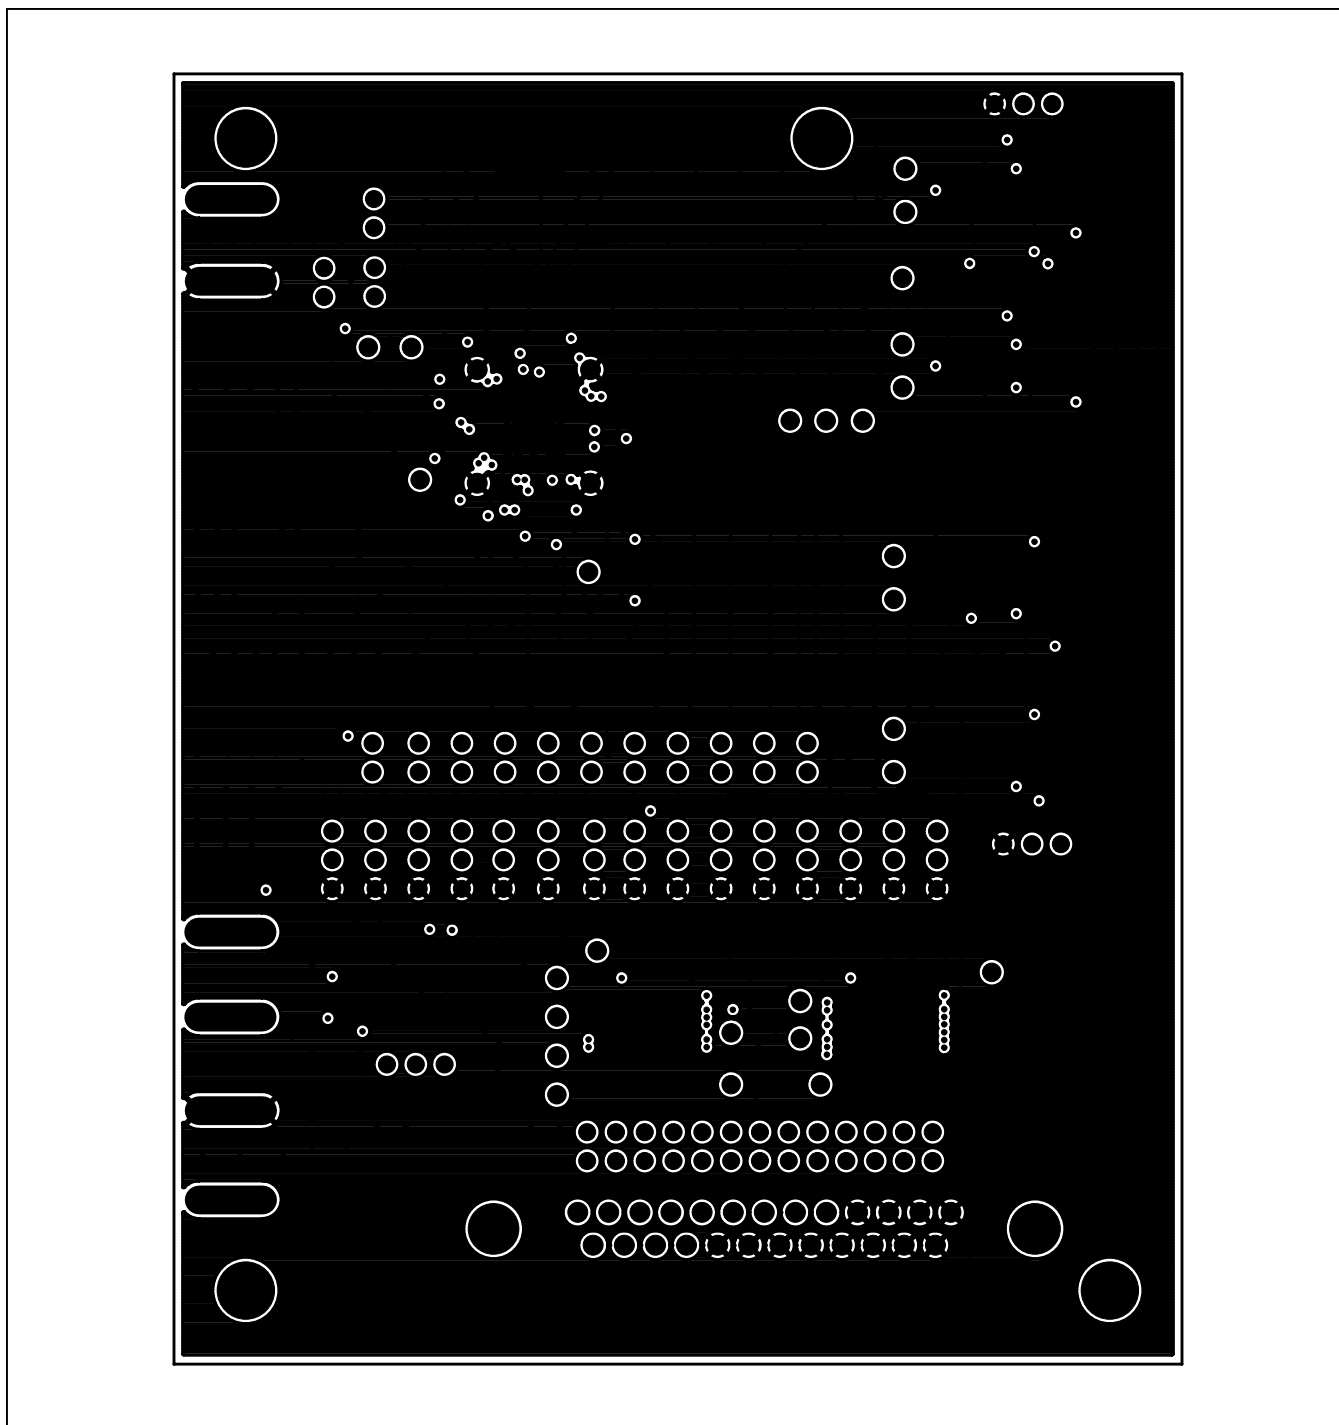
MAX2831 EV Kit PCB Layout—Inner Layer 2 (Ground Layer)
